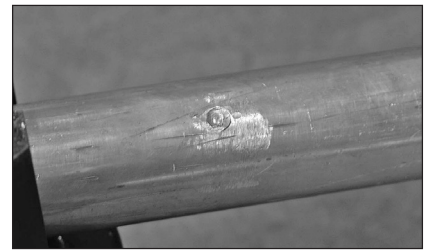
Peen edge of filler hole over top surface of plug.
